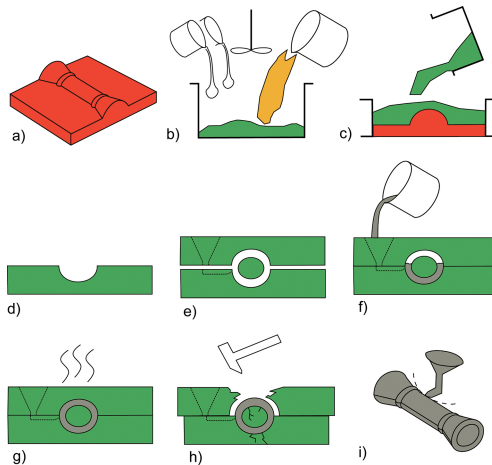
Diagram of the conventional sand casting process: (a) model, (b) preparation of the molding material mixture, (c) molding of the model and solidification of the molding material mixture, (d) part of mold (drag), (e) mounting of molds and cores, (f) pouring liquid metal, (g) solidification and weakening of molding material, (h) extraction, and (i) casting with gating.
